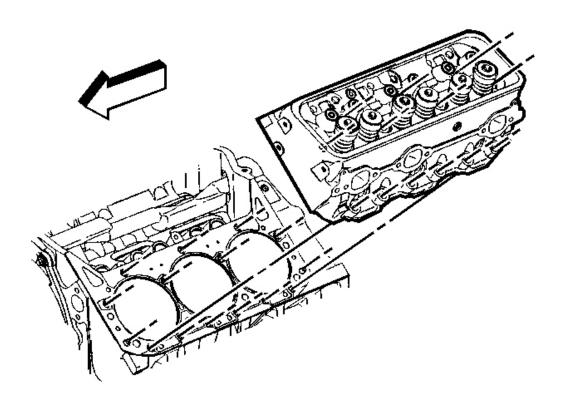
Removing/Installing Cylinder Head (Left) Courtesy of GENERAL MOTORS CORP.
